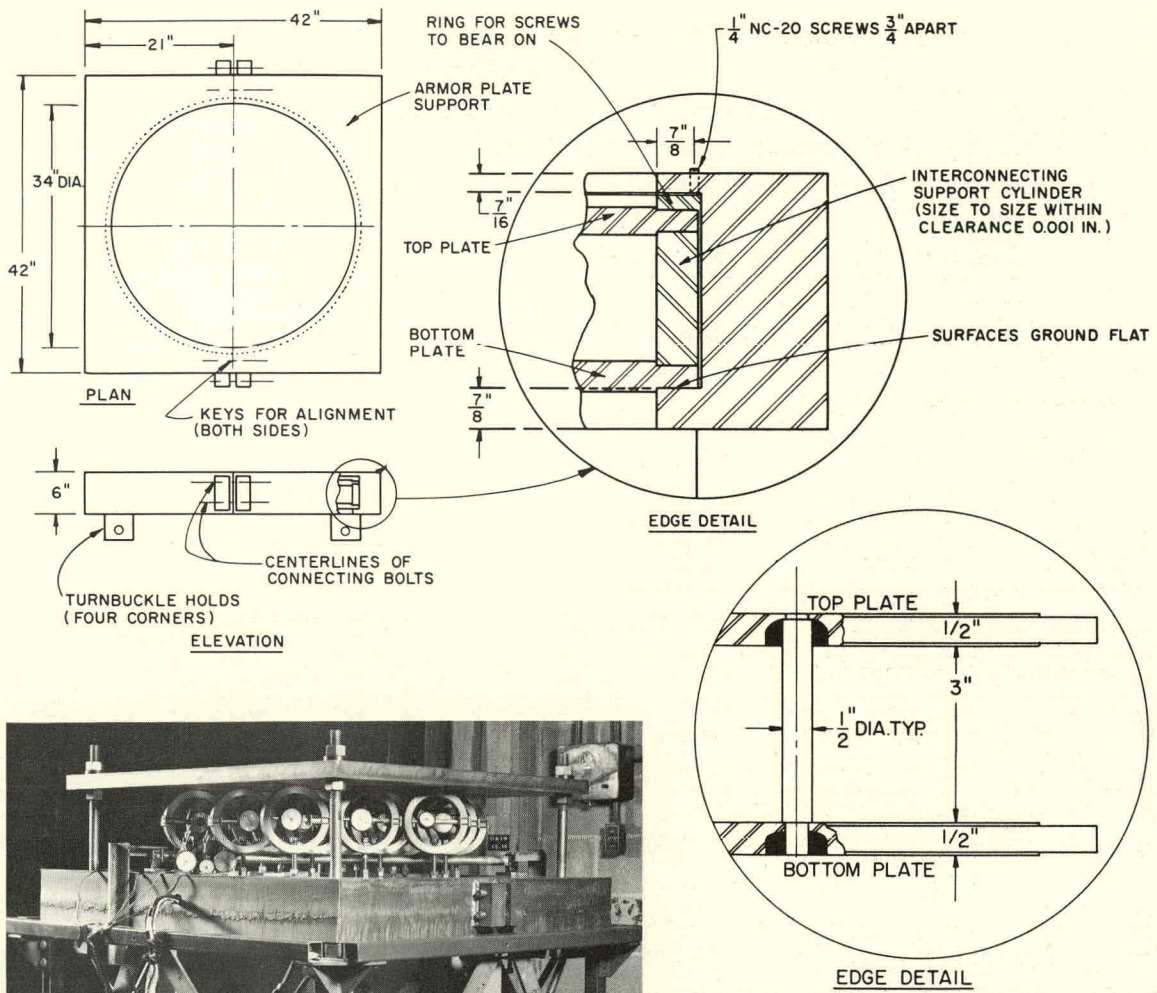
Mock-up of core support grid assembly and test loading arrangement
